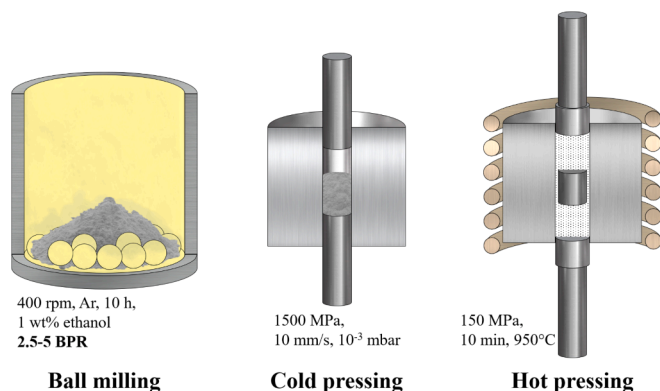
The manufacturing steps in order from left to right: ball milling, cold pressing and hot pressing.
